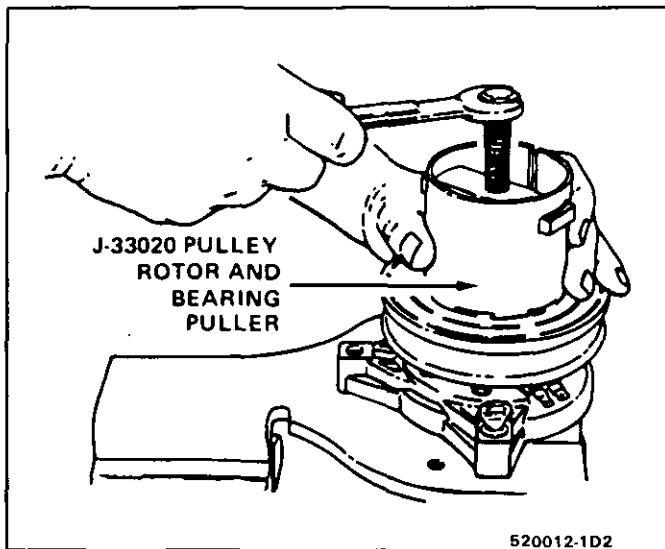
Removing Pulley Rotor and Bearing Assembly
